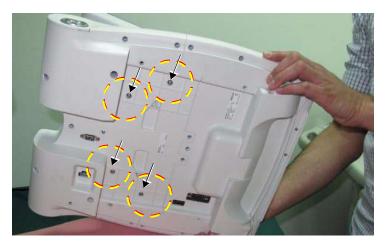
Four Screws Securing the Touch Screen Chassis
